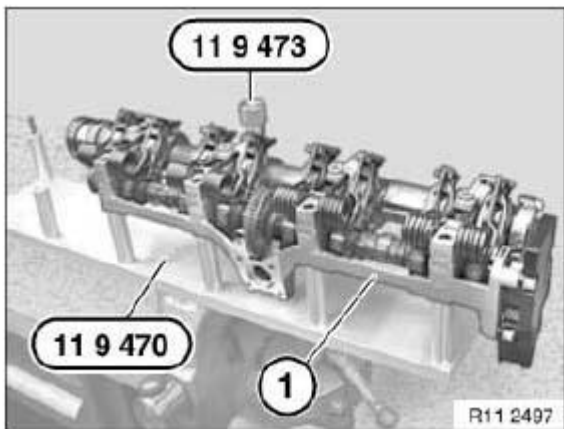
Identifying Special Tools (11 9 470) And (11 9 473)
